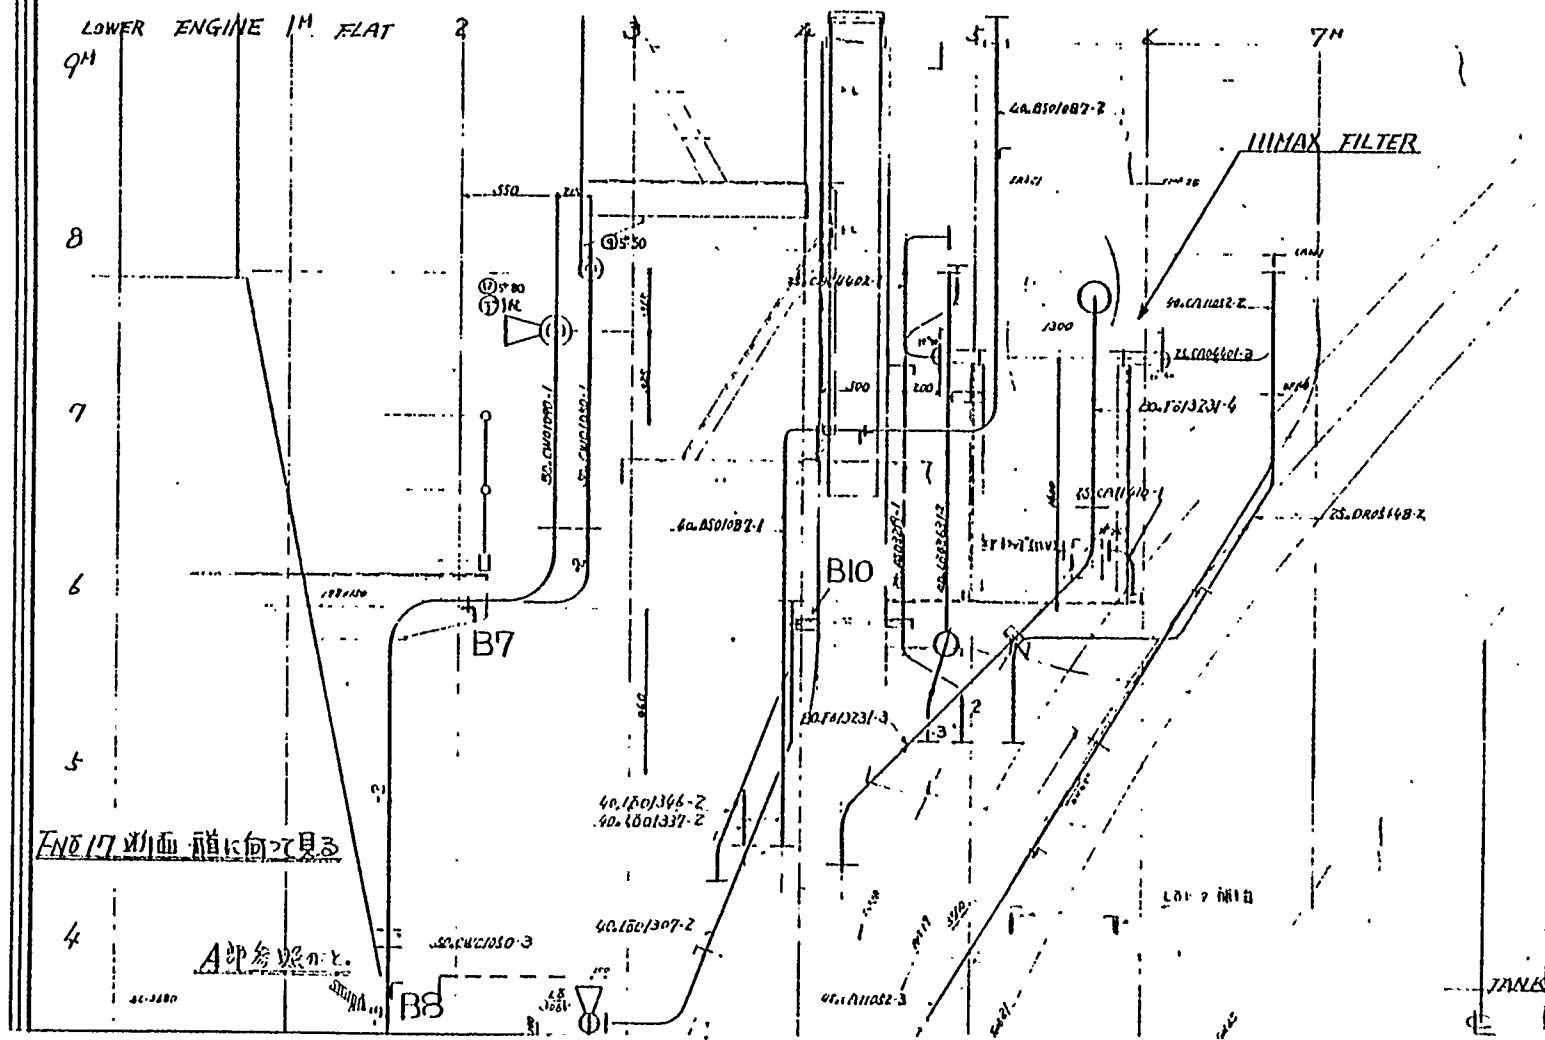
WORK INSTRUCTION DRAWING ON-UNIT FITTING
